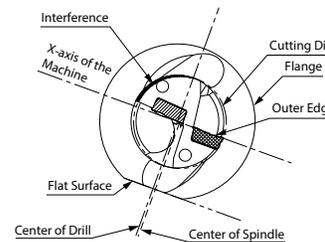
Excessive Offset (For Smaller Hole Diameter)
